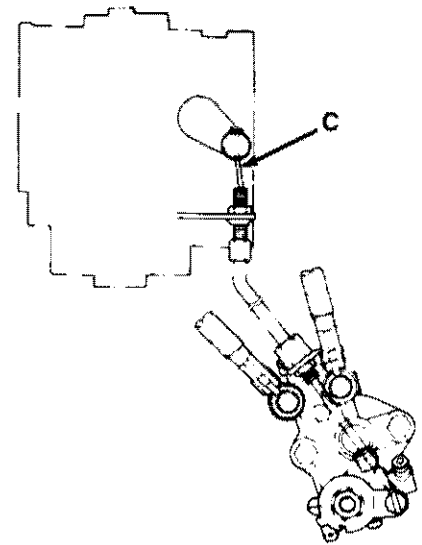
Disconnect oil pump control cable (C) at carburetor throttle lever and refer to text for checking oil pump output.
